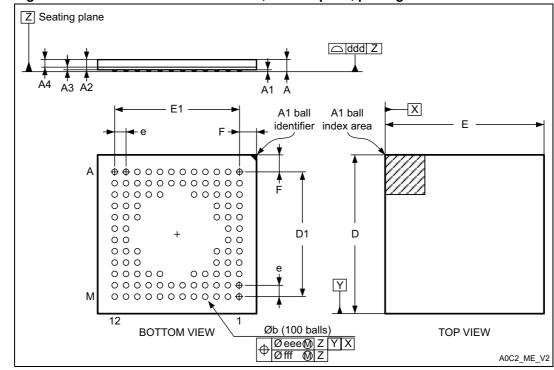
UFBGA100 - 7 x 7 x 0.6 mm, 0.5 mm pitch, package outline
